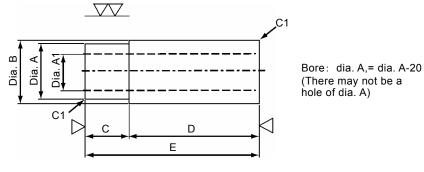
Special Tool for Press Fitting of Rod Bushing W4GB-03-09-009
